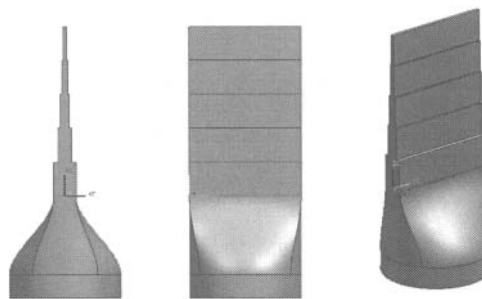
3-D model of 5-step casting with the round-shape gating system. (A) XZ view; (B) YZ view; (C) isometric view.
